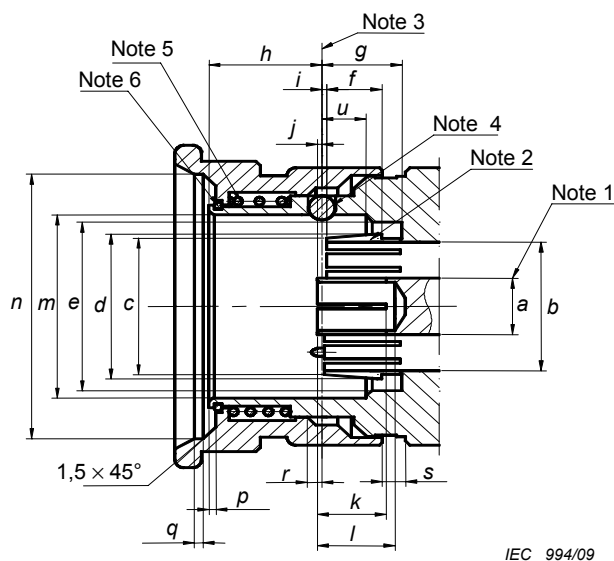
Connector with socket-centre contact (for dimensions, see Table 2)
